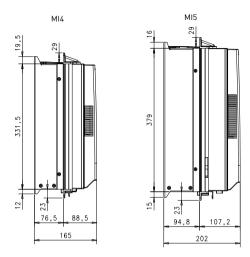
Flange mounting depth dimensions for MI4 and MI5 (Unit: mm)
